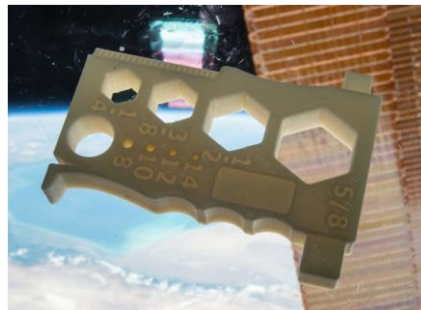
Multipurpose Precision Maintenance Tool (MPMT) printed on the ISS
